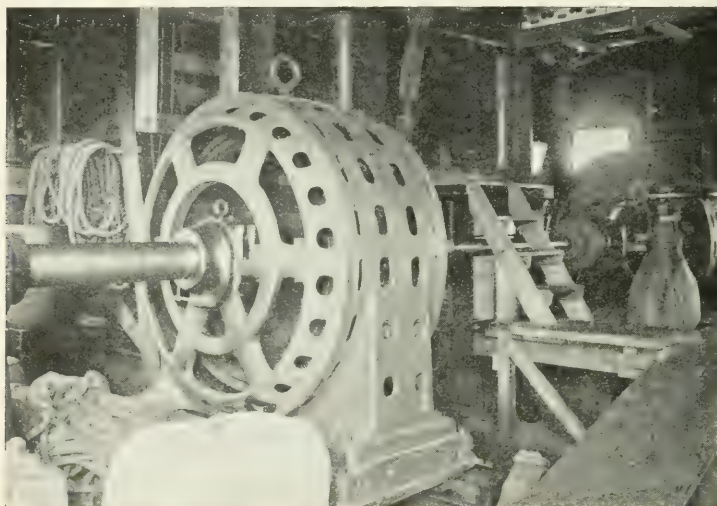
TWO-MOTOR EQUIPMENT, 500-HP EACH, FOR DRIVING CENTRIFUGAL PUMPS
